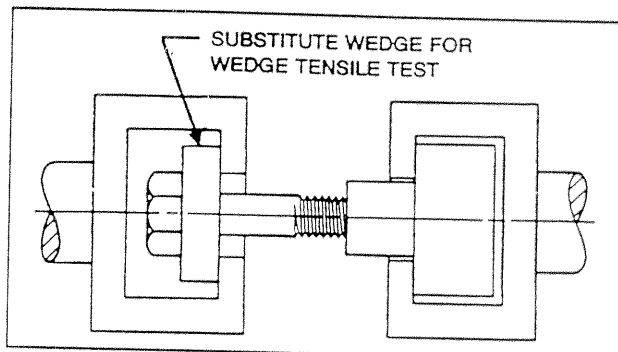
TENSILE TEST OF FULL SIZE BOLT OR SCREW
